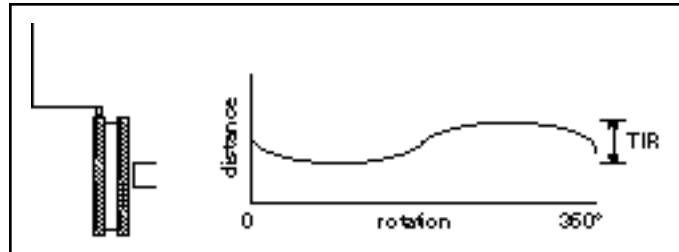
A single probe is mounted parallel to the rotor rubbing surface.
